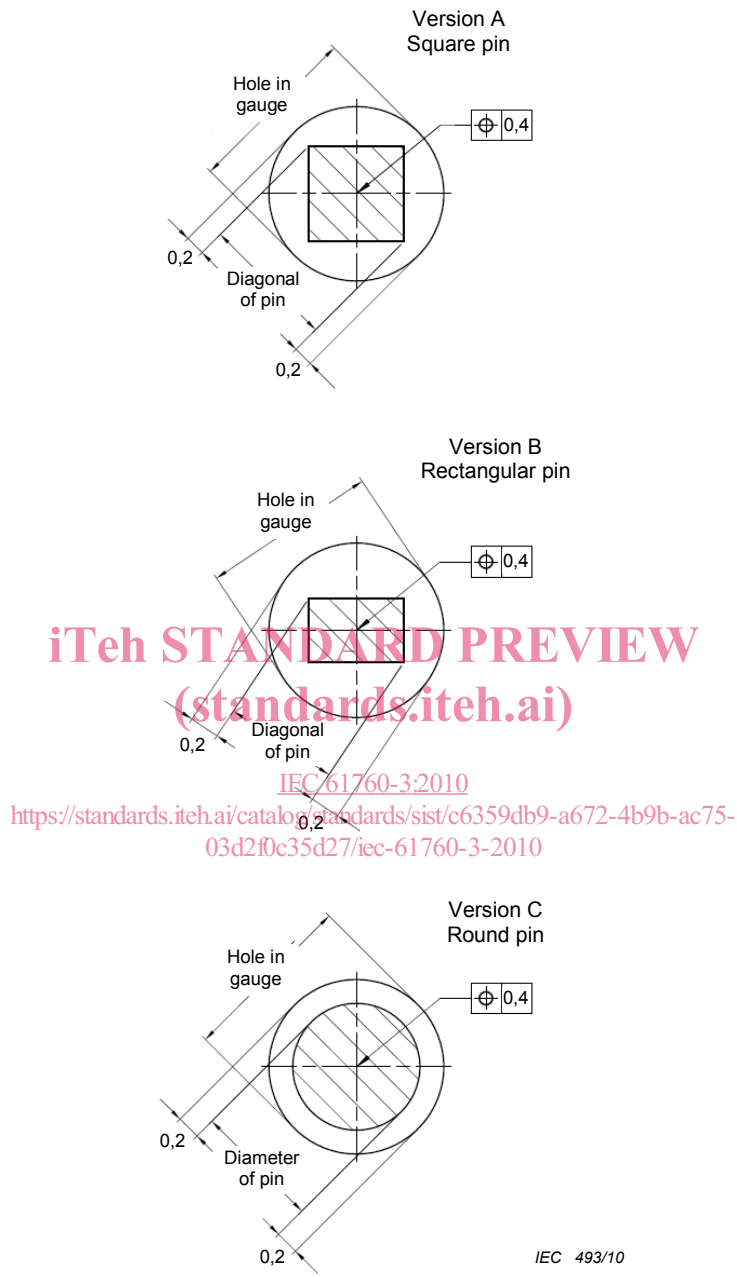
Examples for terminal shapes and position tolerances
